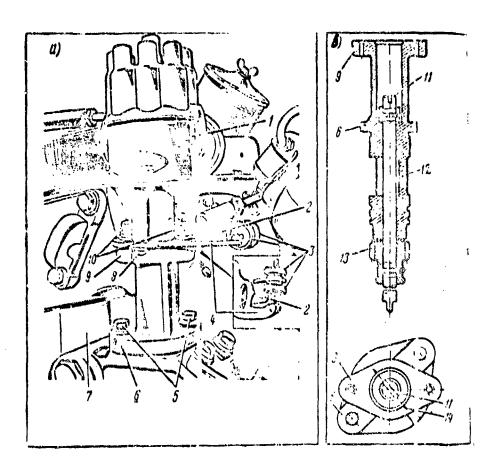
Installation of the distributor on a ZIL-130 engine:
